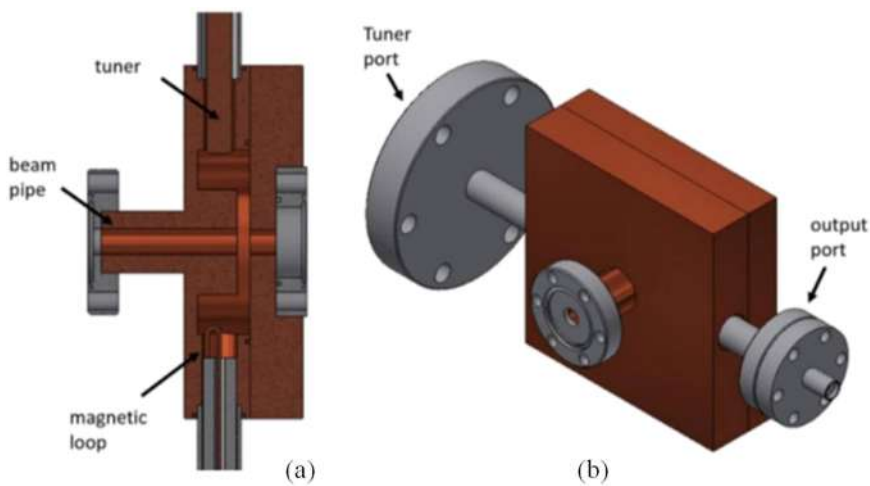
Cavity prototype mechanical drawing: section (a) and complete layout (b).
